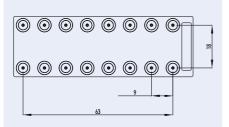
Microscopy slide Luer platform – version 16 fluidic interfaces
